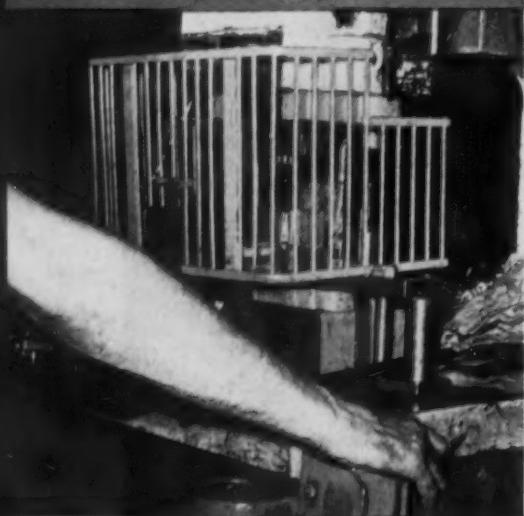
A good example of a die enclosure showing the guard extending above the ram in open position. Die is equipped with an inclined chute with air ejection feature.
